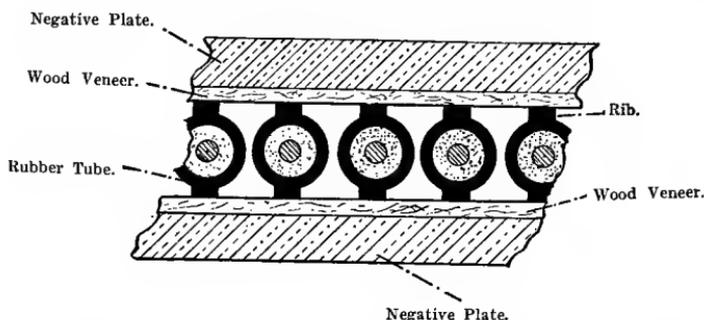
Showing Wood Veneer Separator in "Ironclad" Assembly.
